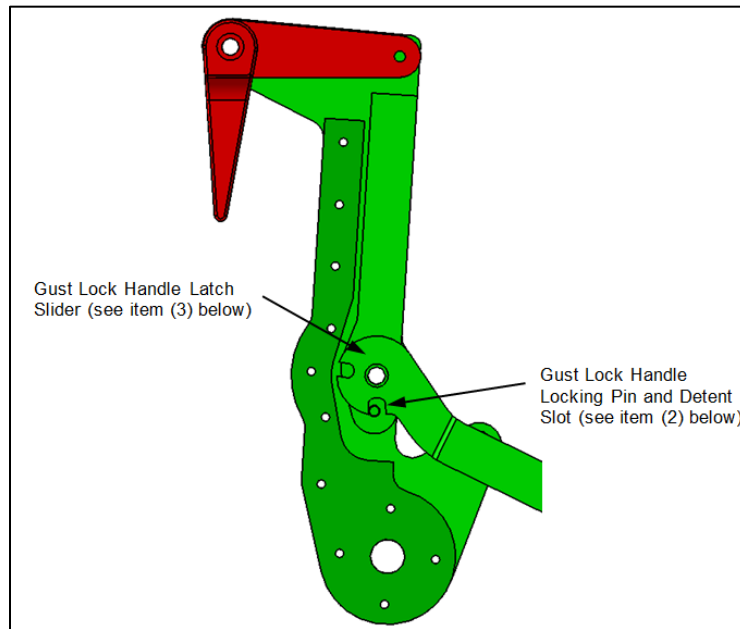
INTERNAL GUST LOCK HANDLE ASSEMBLY (SHOWN IN ENGAGED POSITION)
